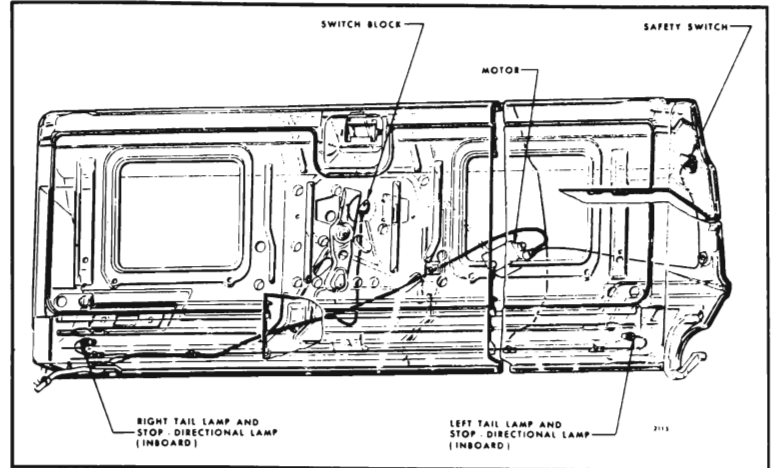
Tail Gate Wiring - Chevrolet "B" Bodies
